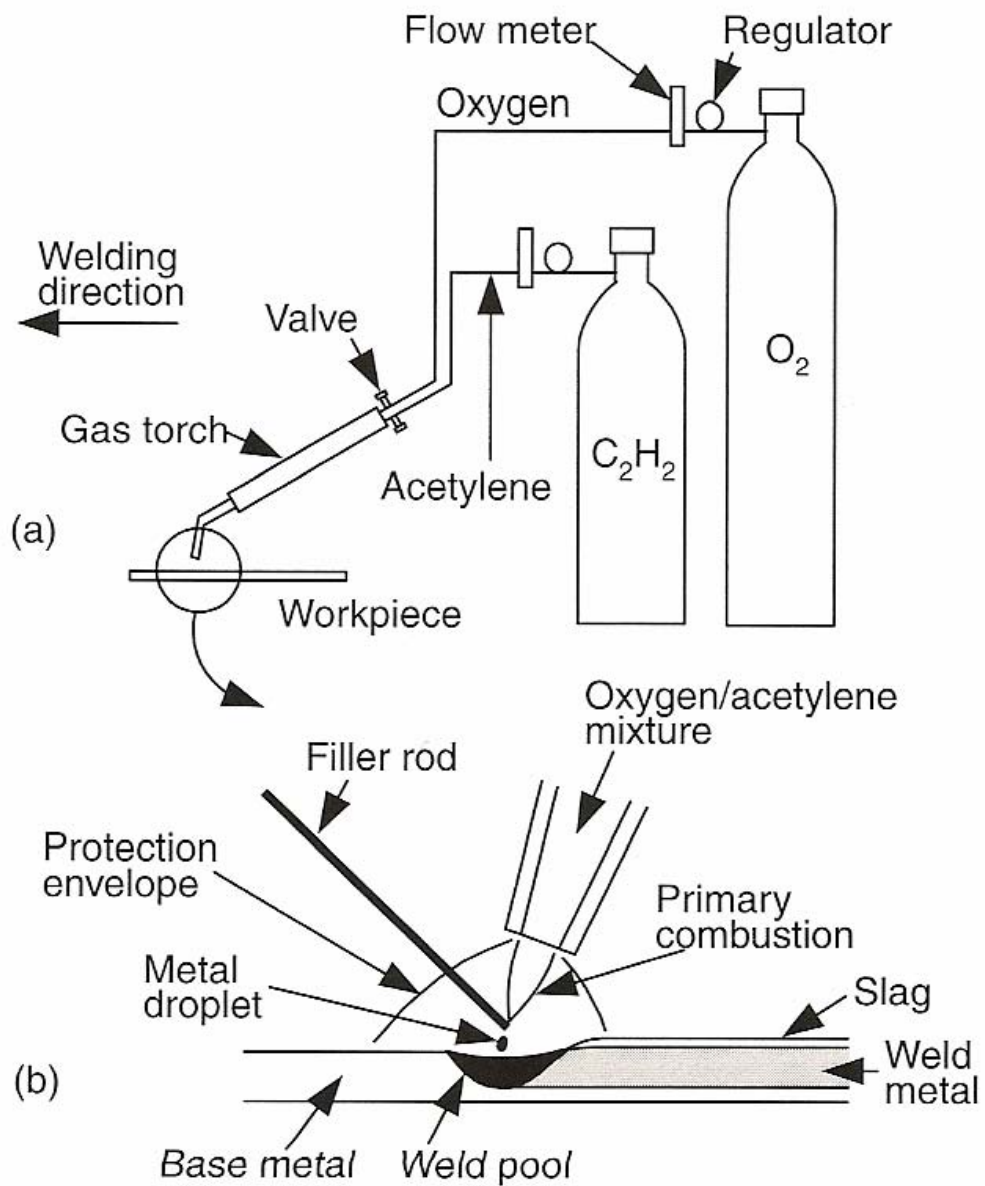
Oxyacetylene welding: a) overall process, b) welding area enlarged [30].
